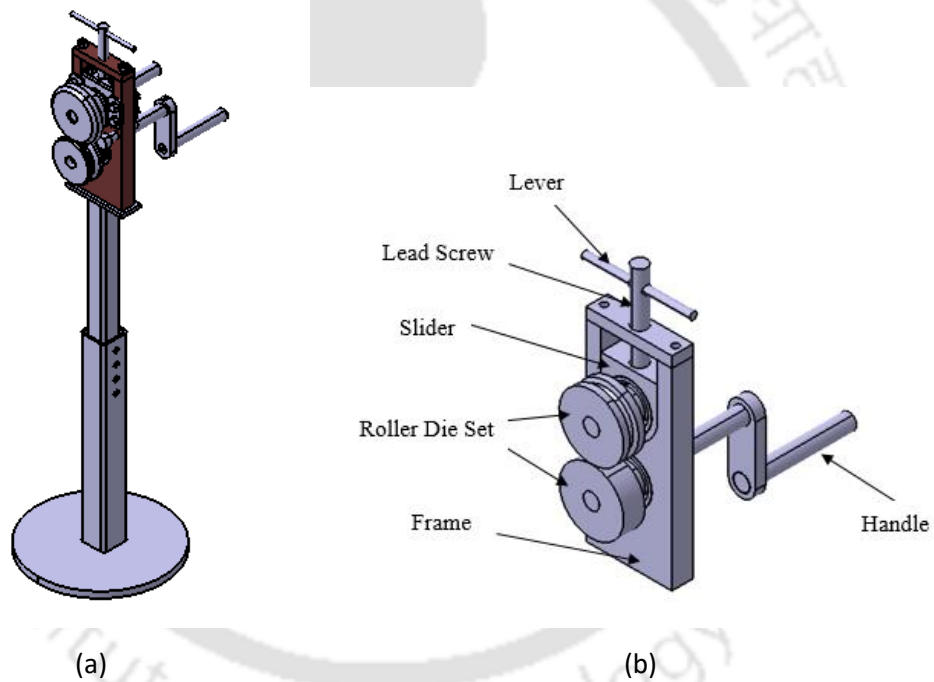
Hemming tool CAD Model 2 (a) with stand and (b) without stand
